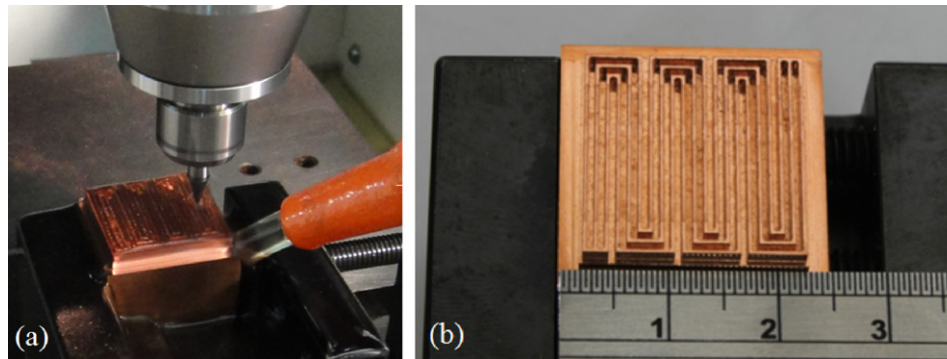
(a) Preparation of the tool piece electrode for die-sinking micro-EDM and (b) the ready-to-use tool piece electrode.
